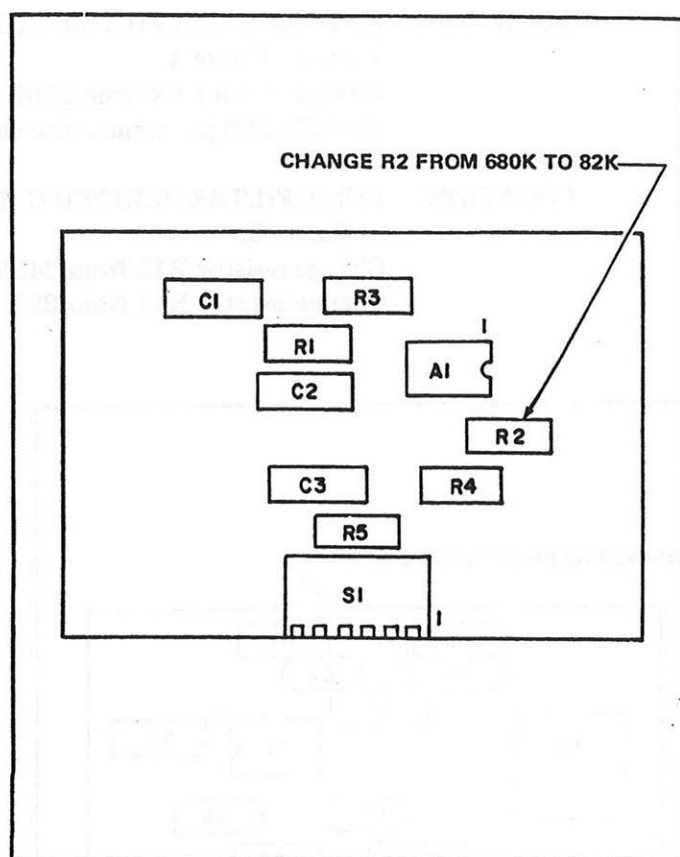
MODIFICATION OF STRING FILTER BOARD 1
